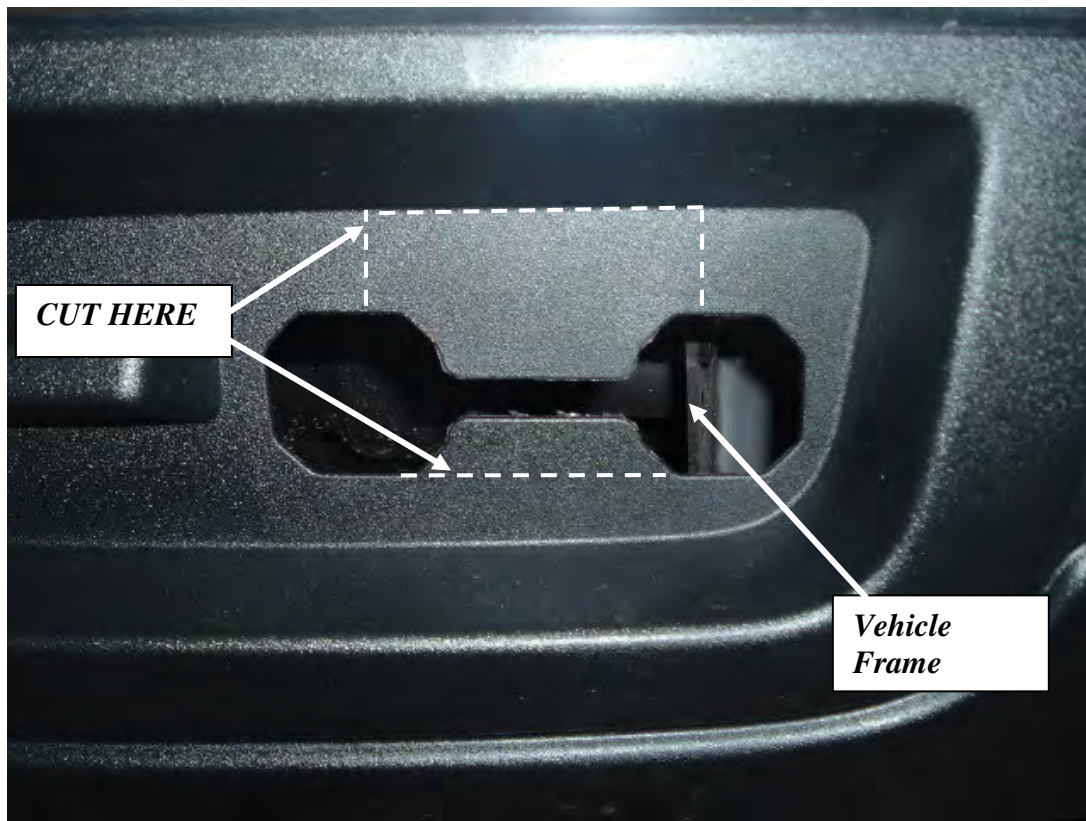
Tow loop bolts – Left side Sierra shown; Silverado similar
